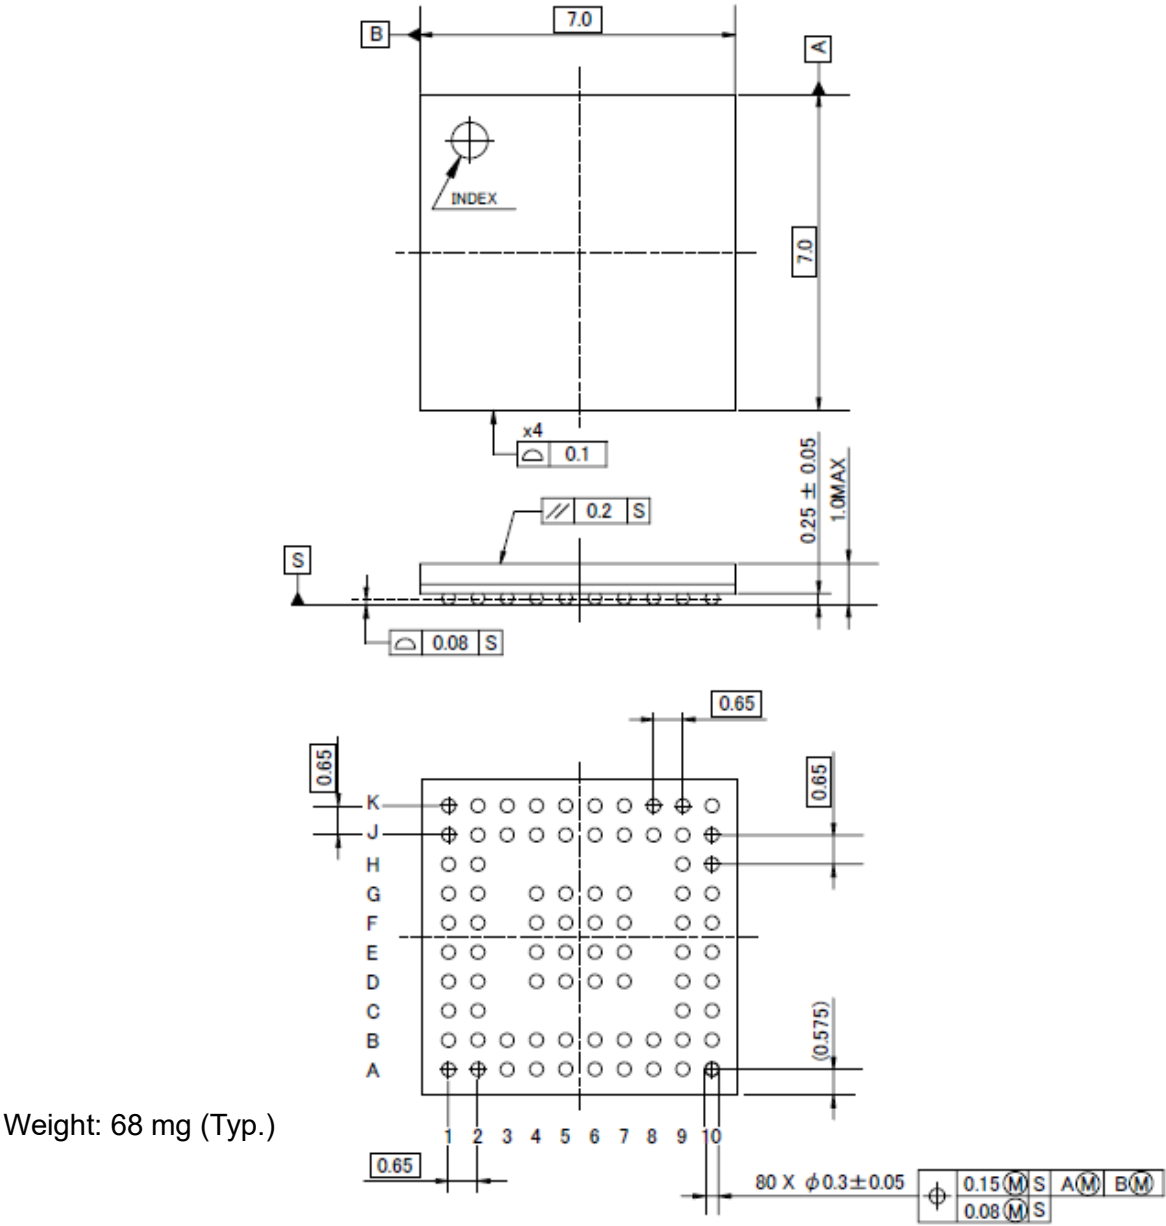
P-VFBGA80-0707-0.65-001 package
